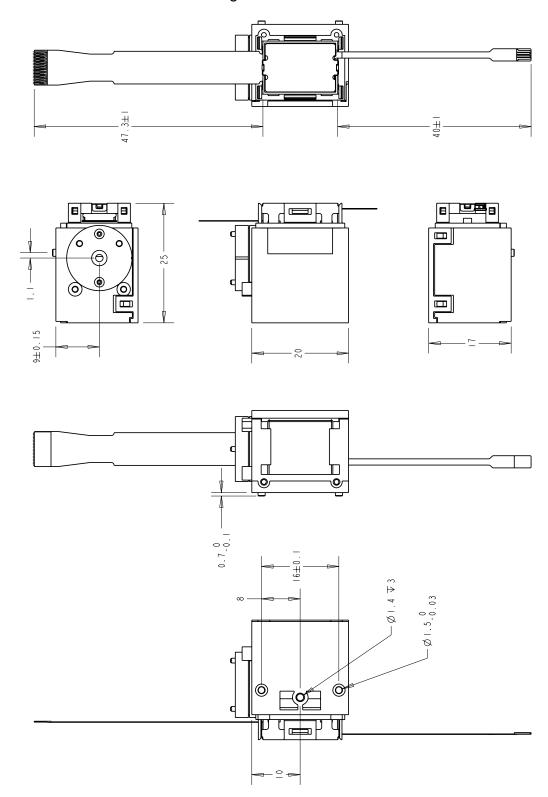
Mechanical Layout KCD-QMNF-ITT
